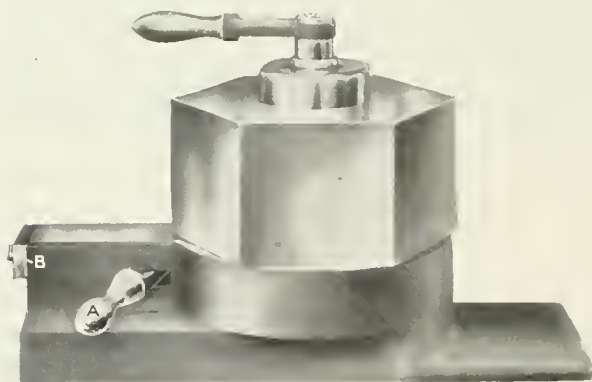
Turret for Carriage of Lathes built by the John B. Morris Machine Tool Co.
